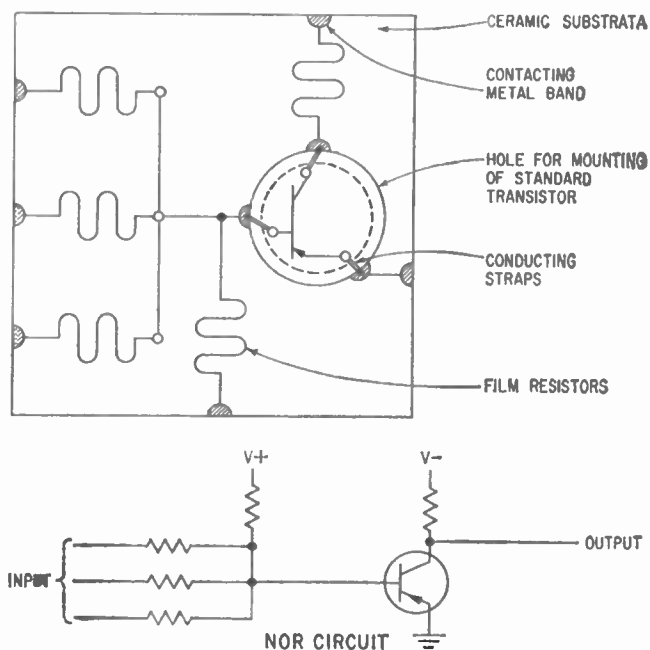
Two-dimensional technique is an extension of concept used to make resistor and capacitor units
